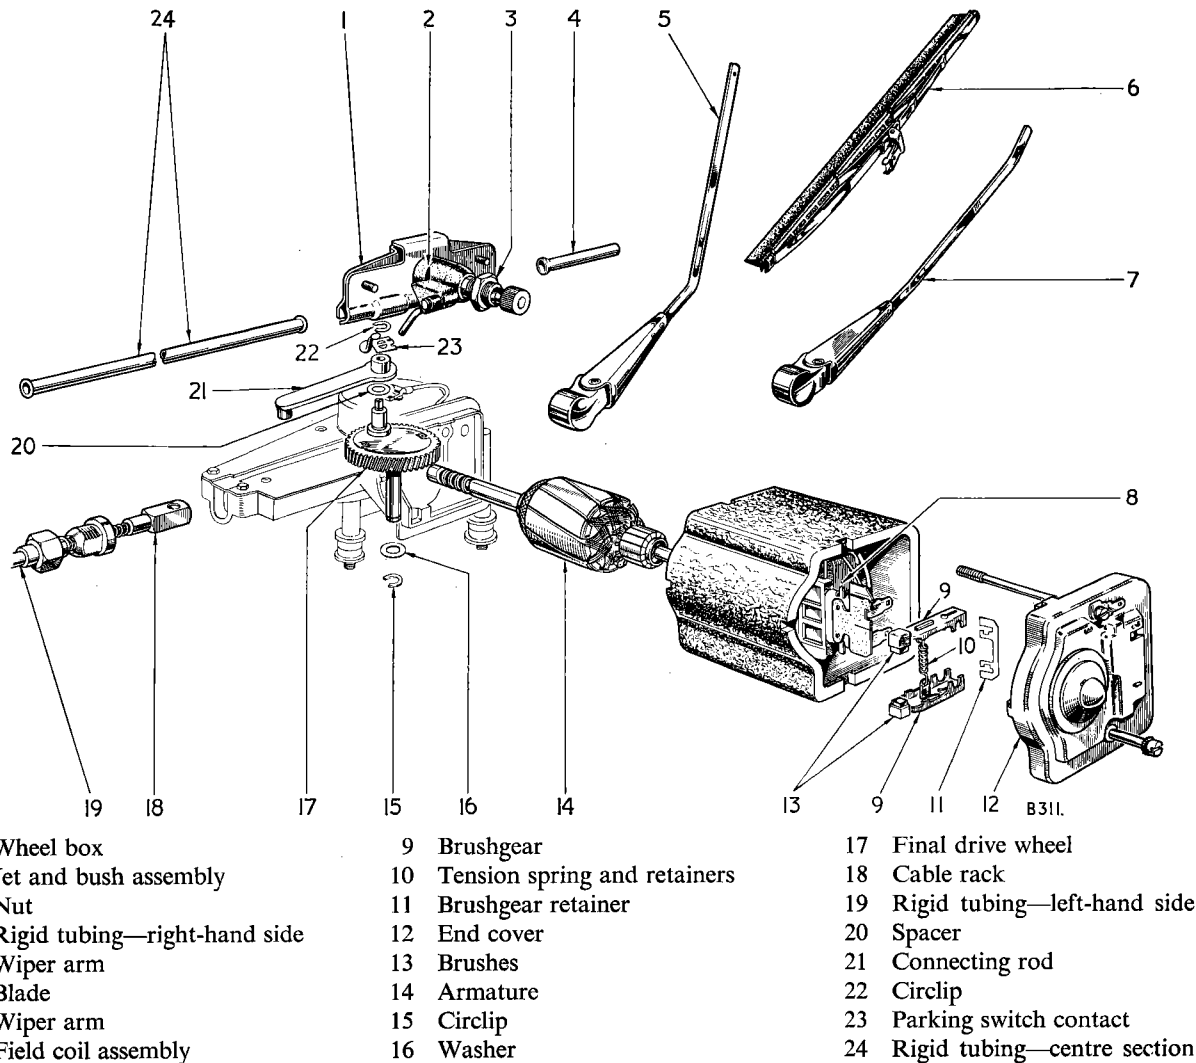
Exploded arrangement of windscreen wiper mechanism
